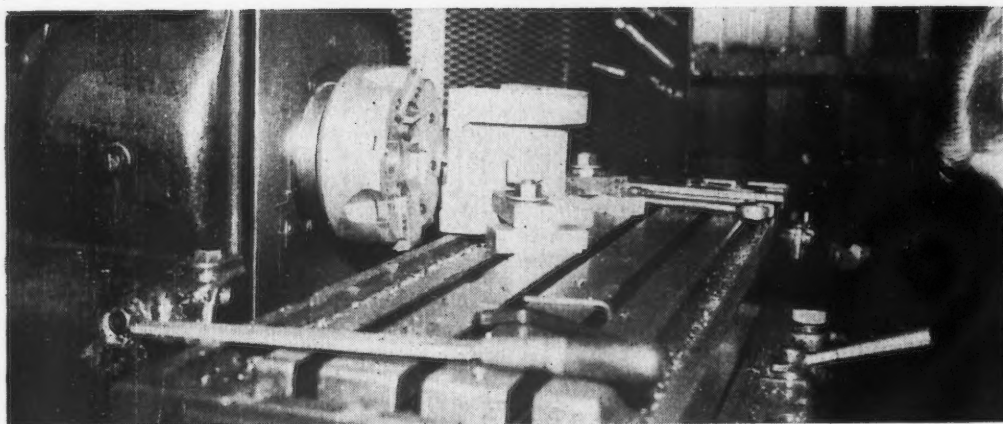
Bearing caps made from boiler plate specification material proved impossible to mill with high speed steel cutters. As shown here they were successfully milled with carbide cutters.
